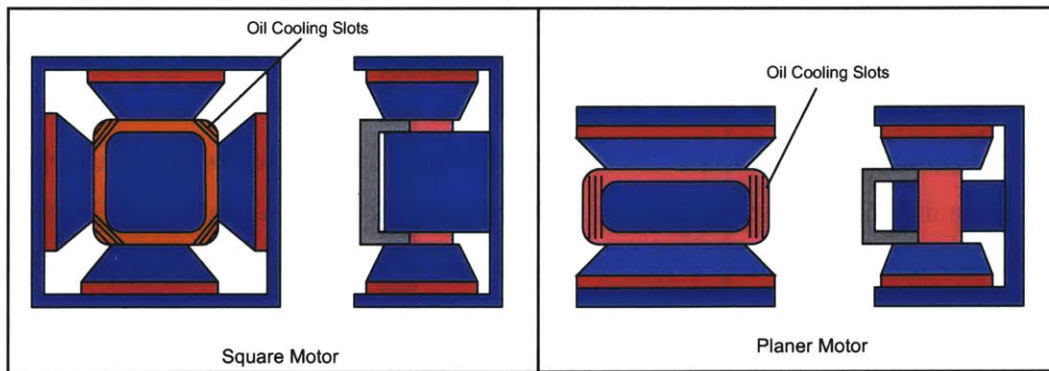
Schematic drawing of a square VCM with end turn cooling and a planar VCM with end turn cooling.
